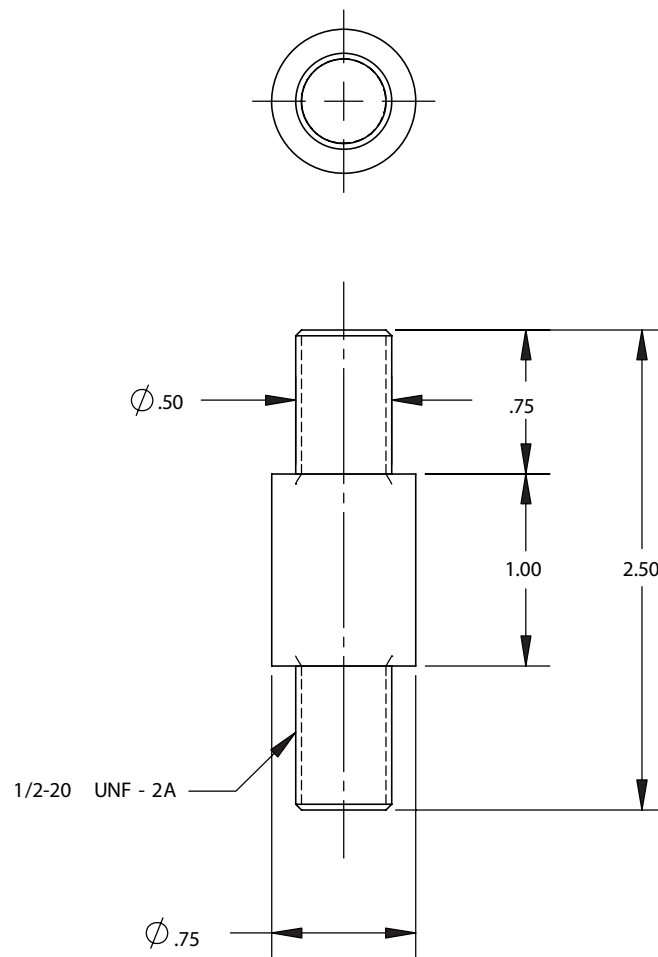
Drawing of the threaded steel connecting rod used in the heated platen load train. Dimension in inches unless otherwise noted.
